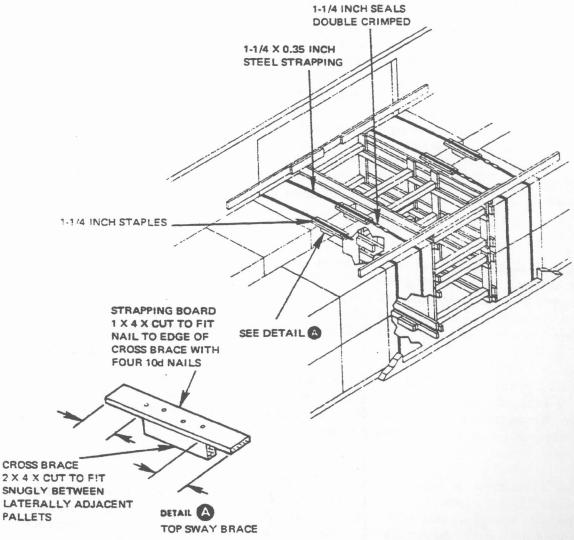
DOORWAY PROTECTION, STRAPPING METHOD
